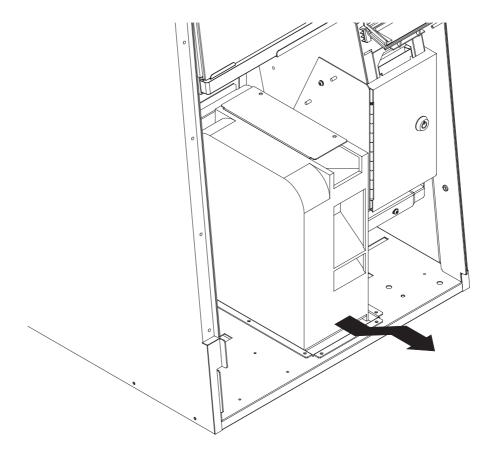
Removing the Mk4 Hopper from the ES500 Machine
